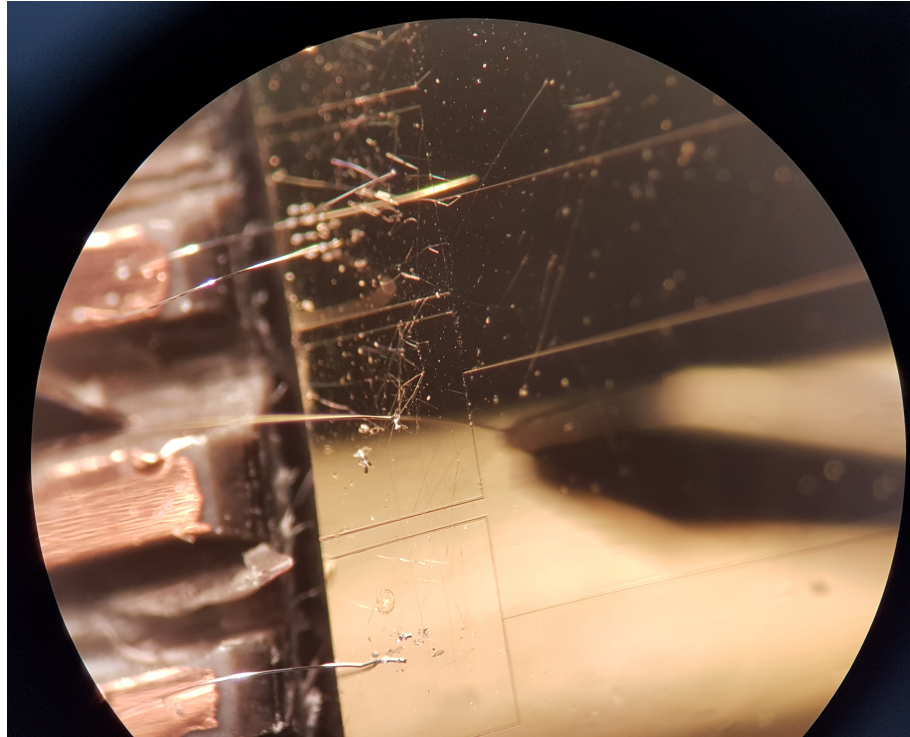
Aluminium wire of 25.4  $\mu\text{m}$  diameter bonding the Pads of MIR Chip to the PCB board. Picture taken using a microscope.
